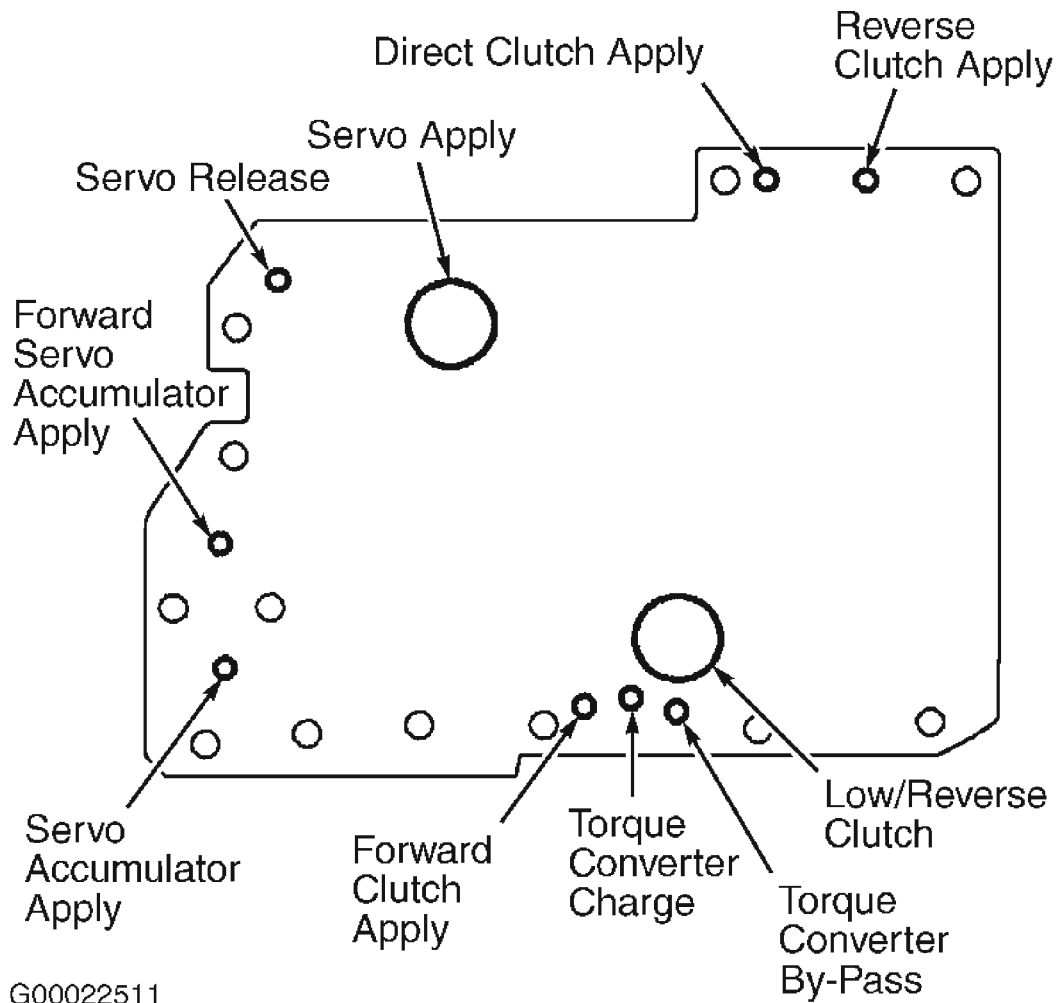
Identifying Transaxle Pressure Test Plate Ports
